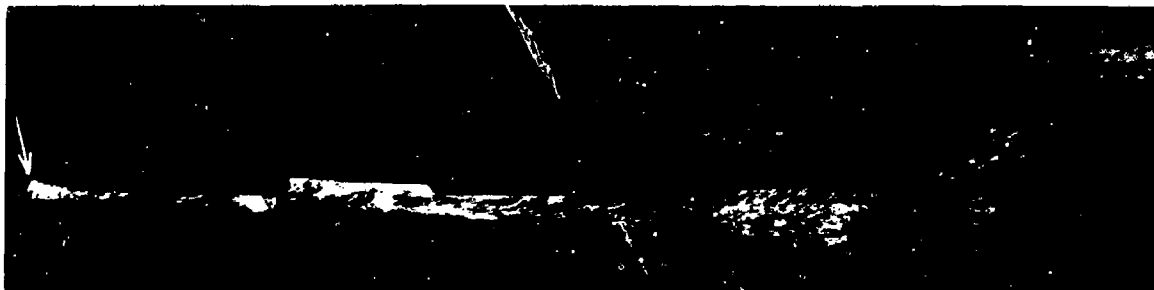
Primary fracture surface in LAW motor failure showing the primary initiation site (Reference 2). Mag. 3.5X
